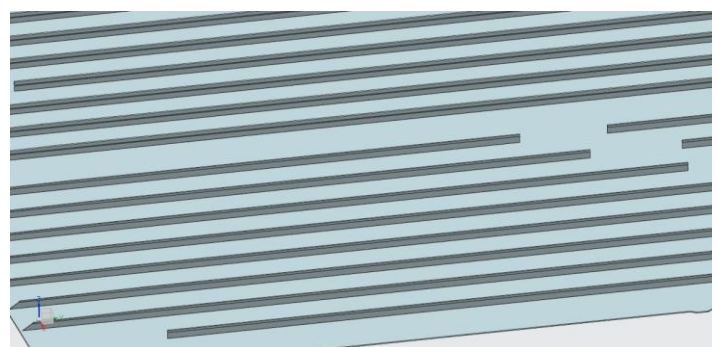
3D- View of Welded Ribs over the Flat Titanium Sheet.
